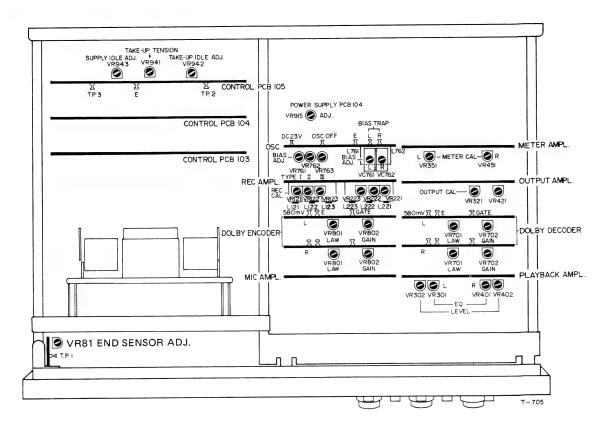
Ampl. P.C.B. and Adj Points Location
